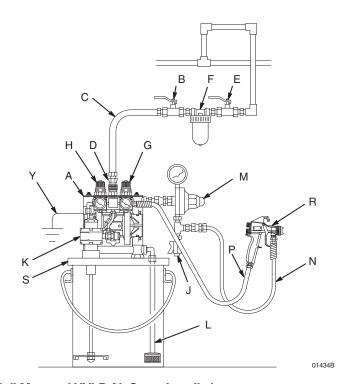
Pail-Mounted HVLP Air Spray Installation
